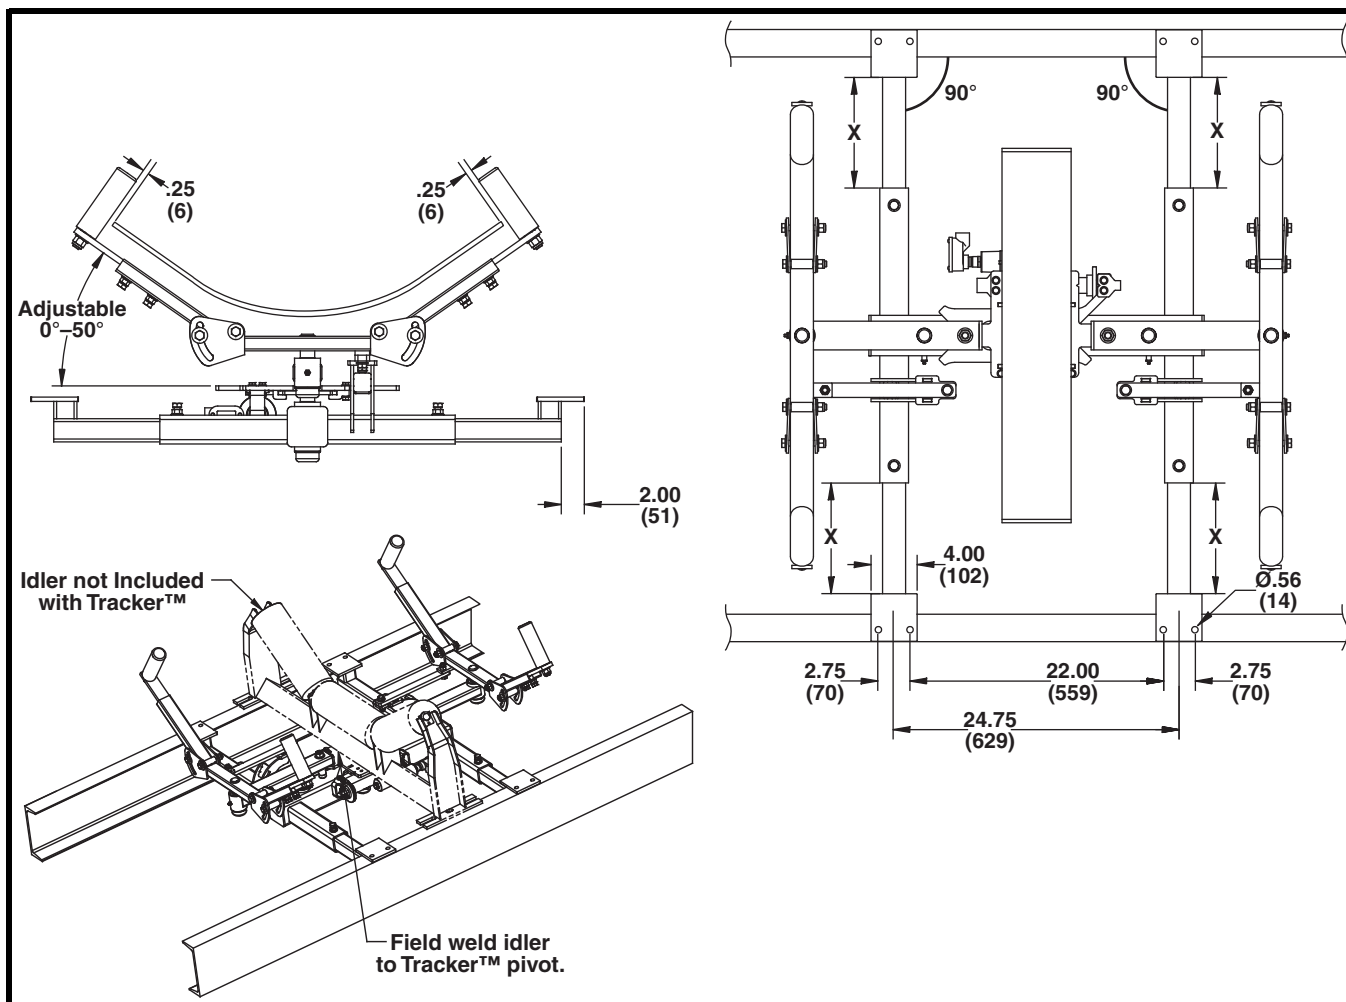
Mounting Dimensions–Martin® Tracker™ Reversing (Upper Unit)
